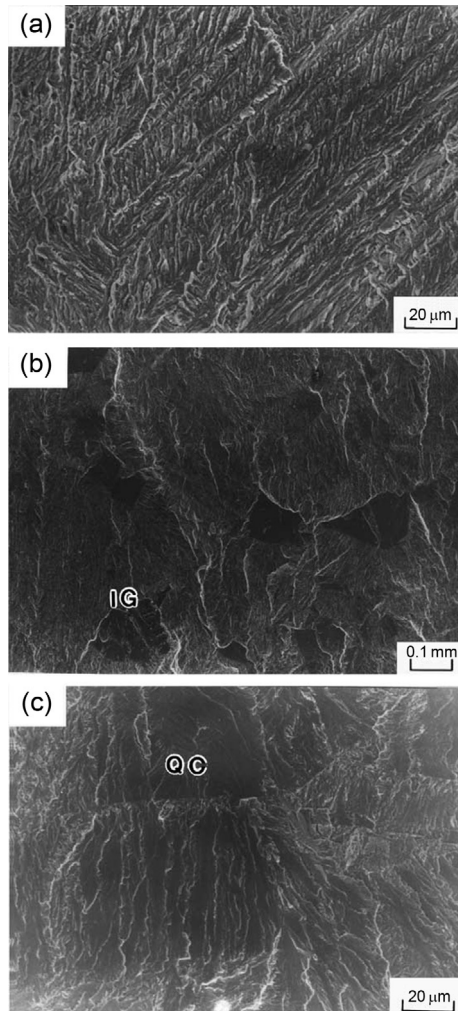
Fatigue fractographs of as-received (AR) specimens showing (a) transgranular fatigue fracture in air, (b) twin boundary separations and intergranular (IG) fracture in air, and (c) QC fracture in hydrogen [186].
